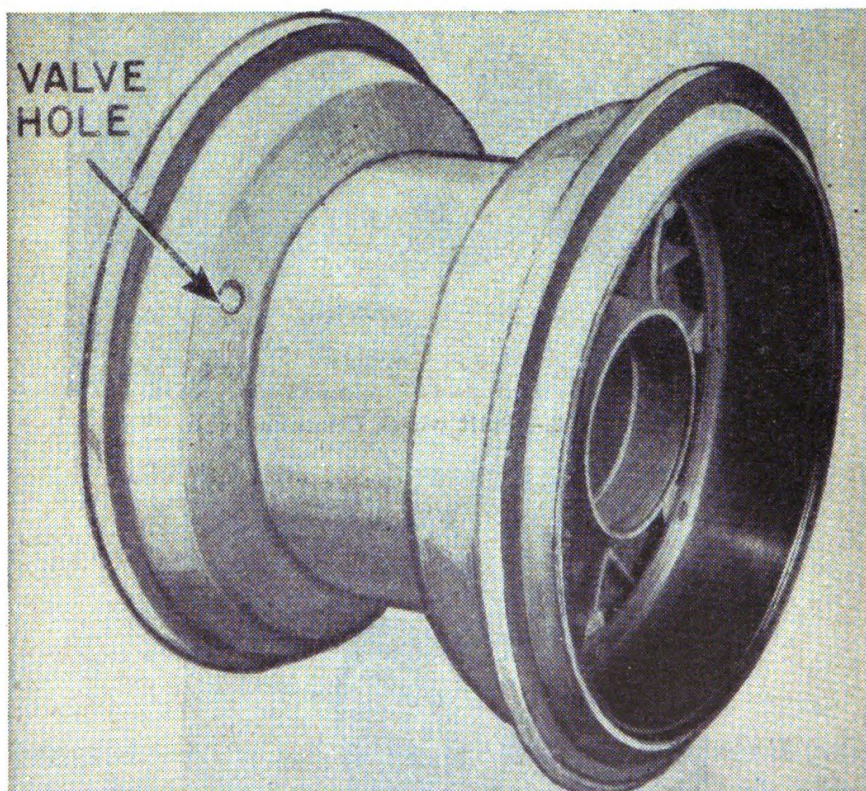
Drop-center wheel with nonremovable side flange.
